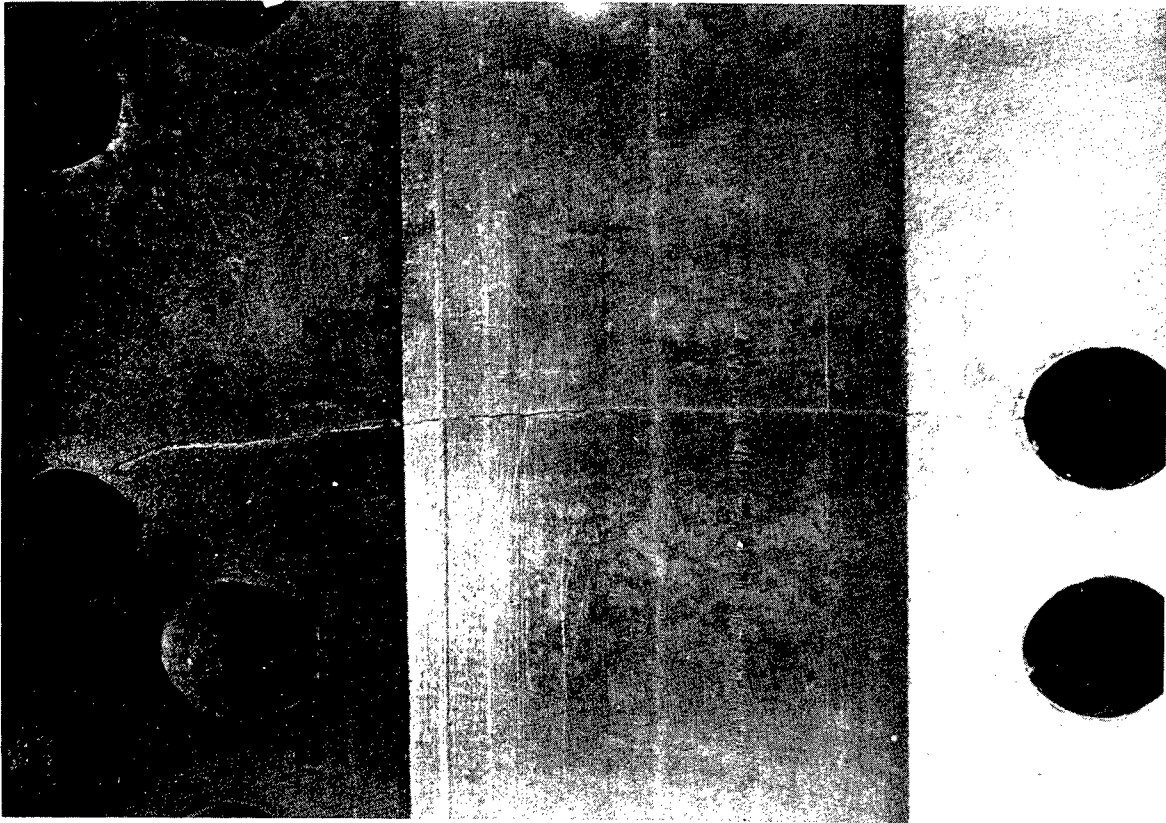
Base of tube plate in boiler drum showing crack athwartships between tube holes ($\frac{1}{2} \times$)
